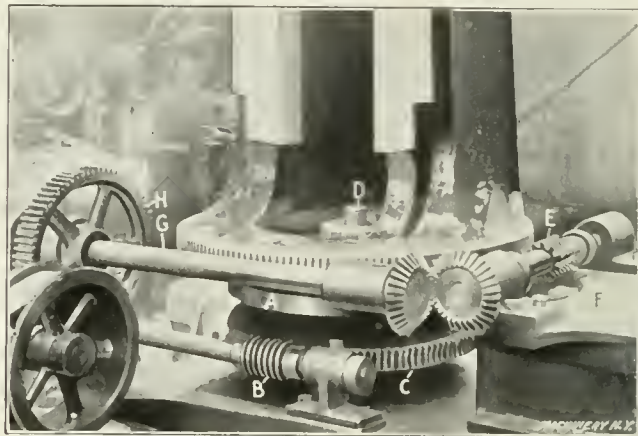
View of Working Parts of Worm-gear Hobbing Machine
